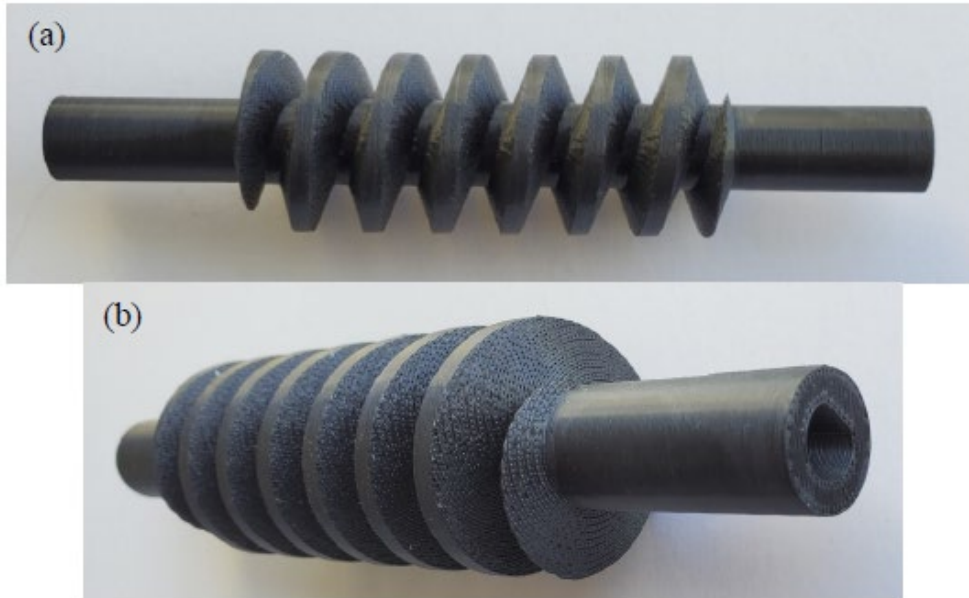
3D Printed worm: (a) front view, and (b) perspective view showing the key of the worm shaft on the right side.
